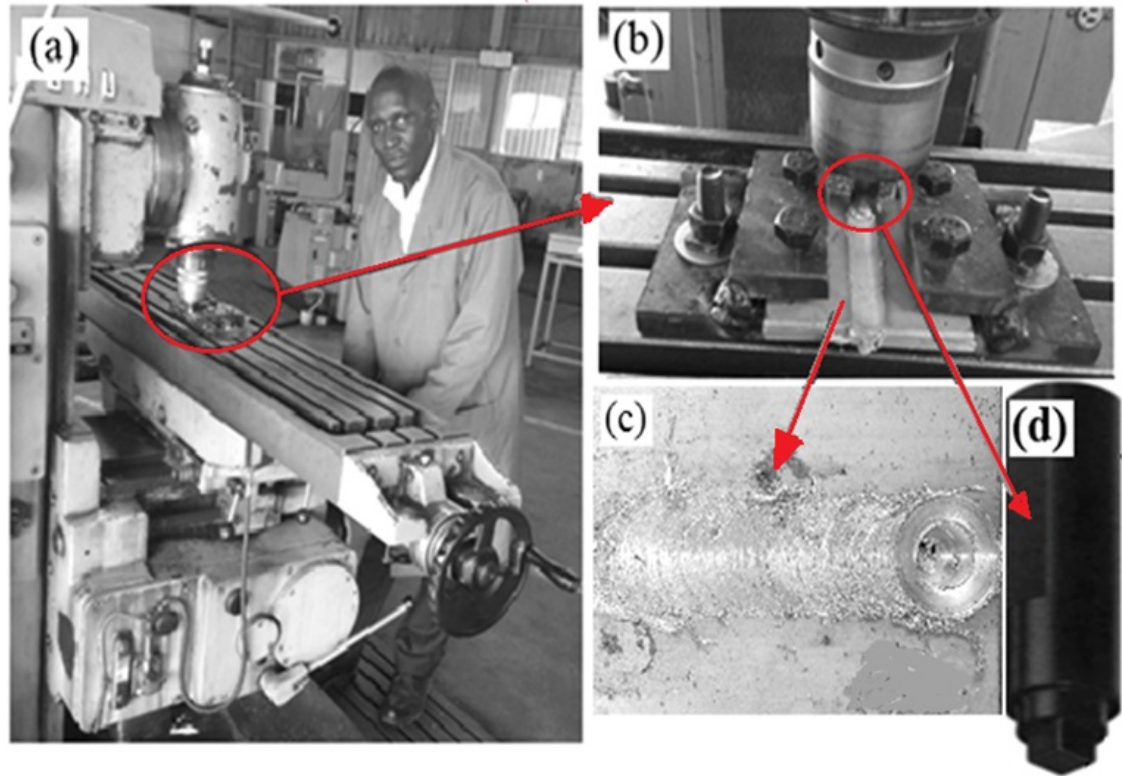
The FSW Setup: (a) Enshu Universal Milling Machine; (b) Detailed Spindle, Fixture and Workpiece; (c) Workpiece Processed at 1320 RPM and 100 mm Feed Rate and (d) Square Tool
